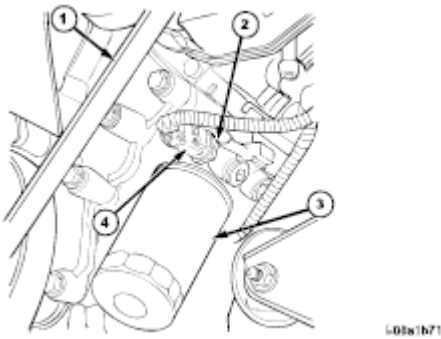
Identifying Oil Pressure Sender Connector And Pressure Sender
